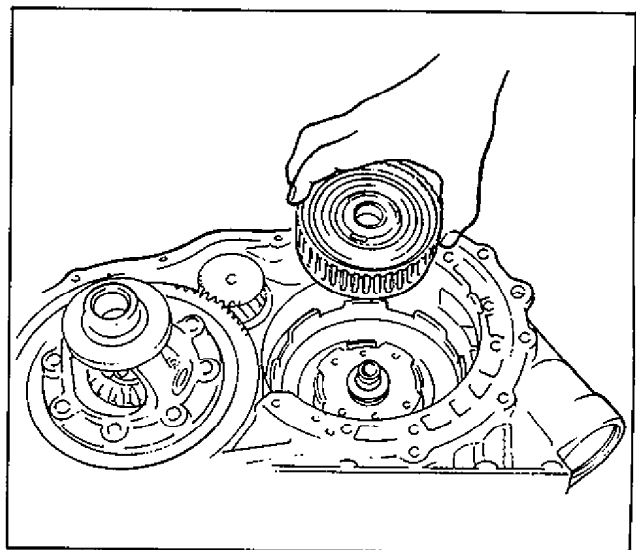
B-206 Installing Front Planetary Ring Gear Assembly
